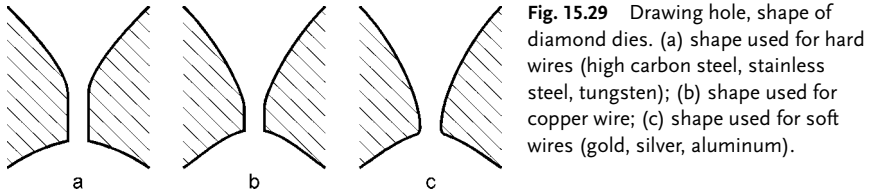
Drawing hole, shape of diamond dies. (a) shape used for hard wires (high carbon steel, stainless steel, tungsten); (b) shape used for copper wire; (c) shape used for soft wires (gold, silver, aluminum).
